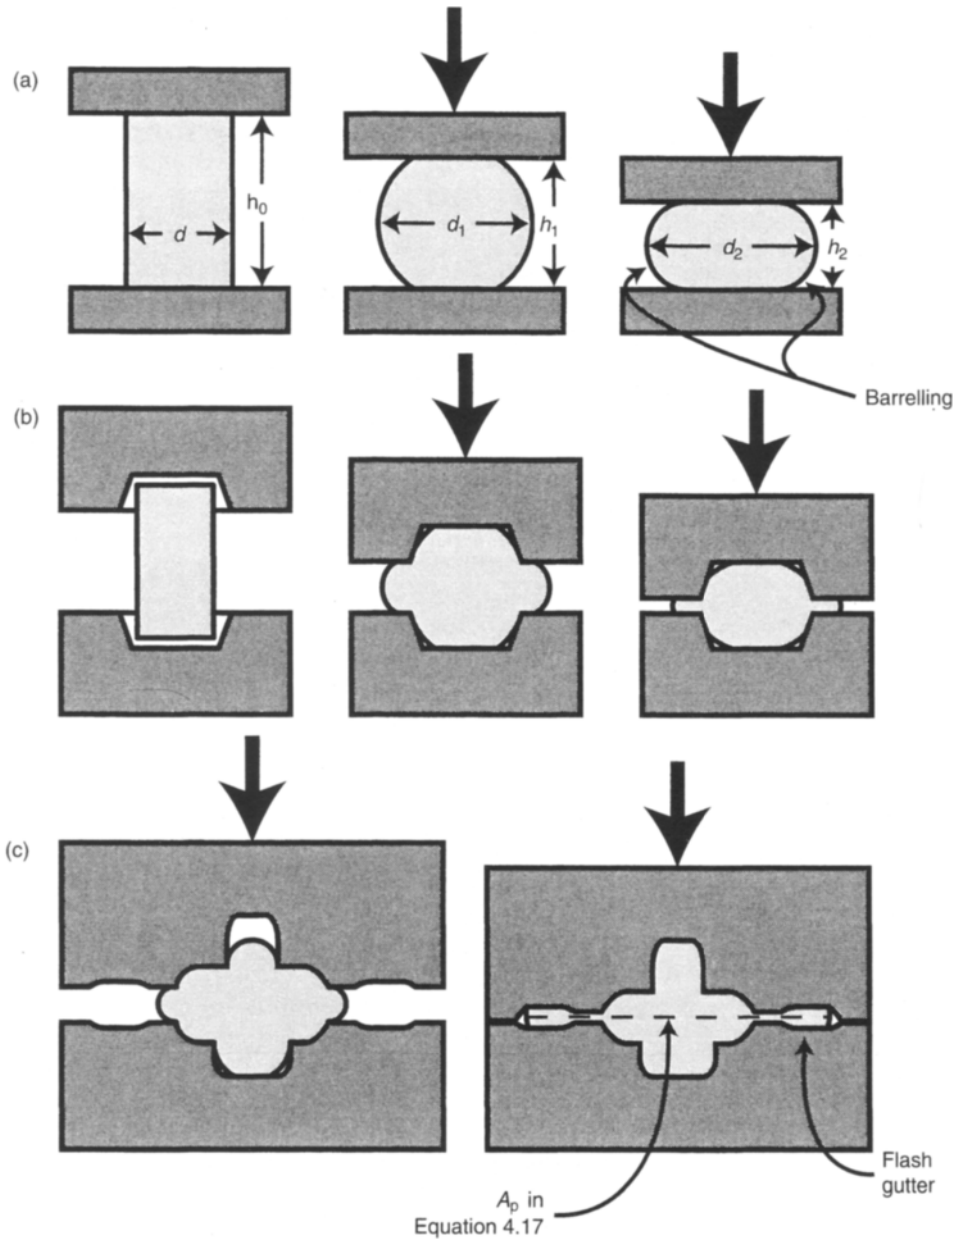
The processes of (a) open die forging, (b) closed die forging, and (c) impression die forging.
